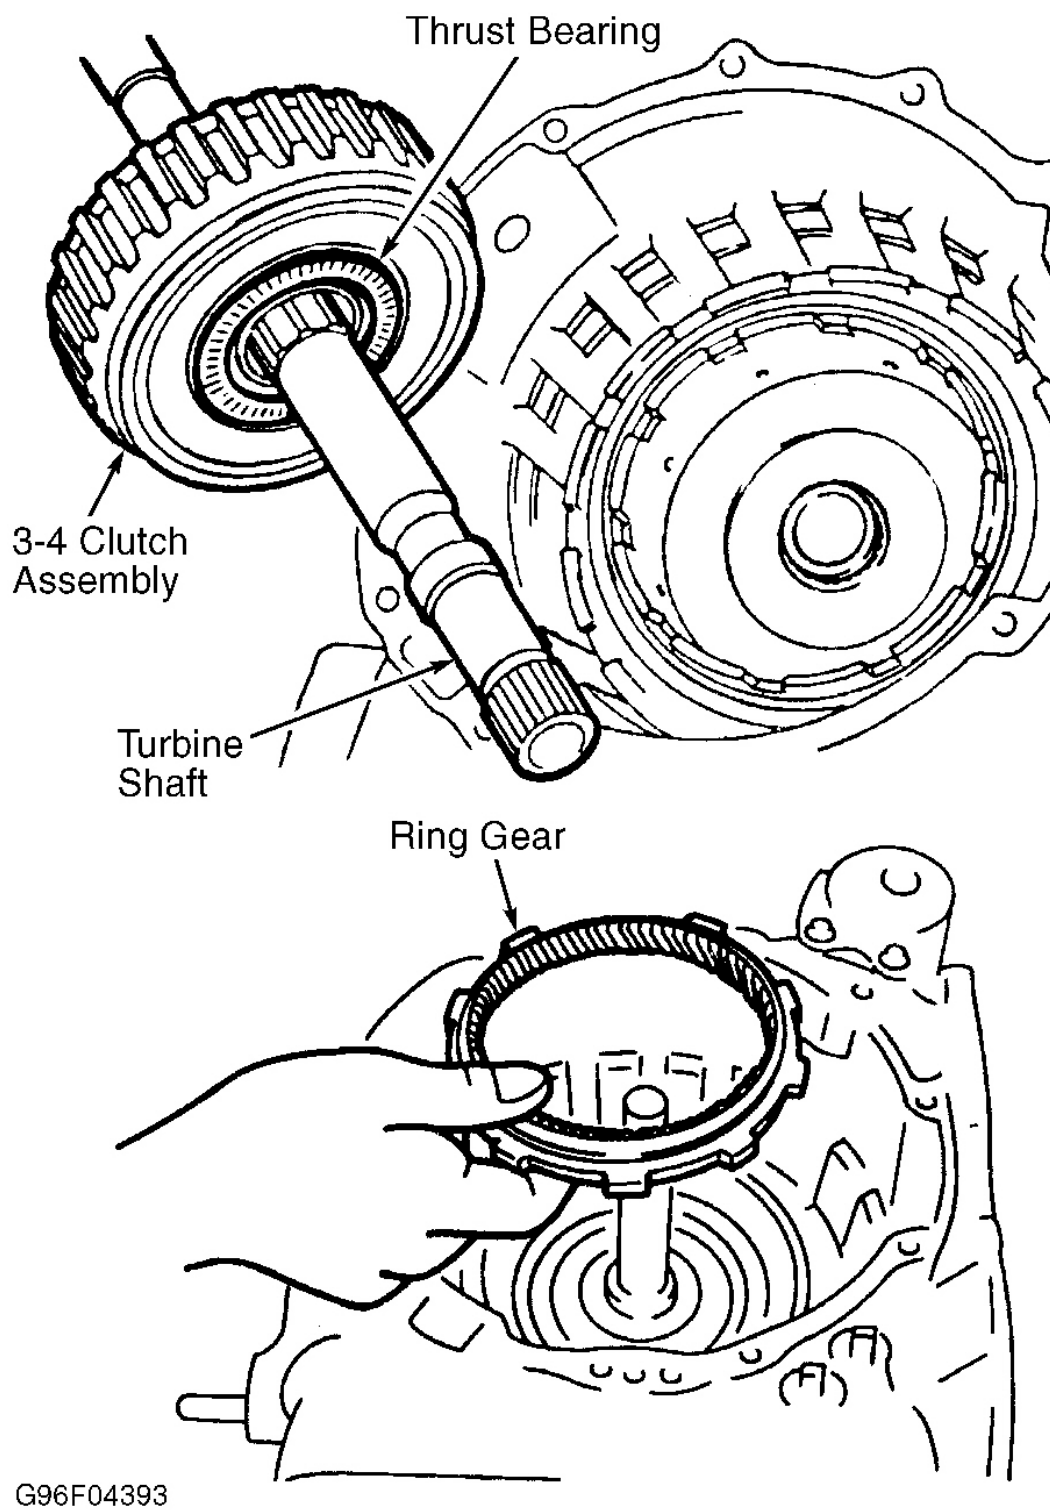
Installing Turbine Shaft, 3-4 Clutch Assembly & Ring Gear
